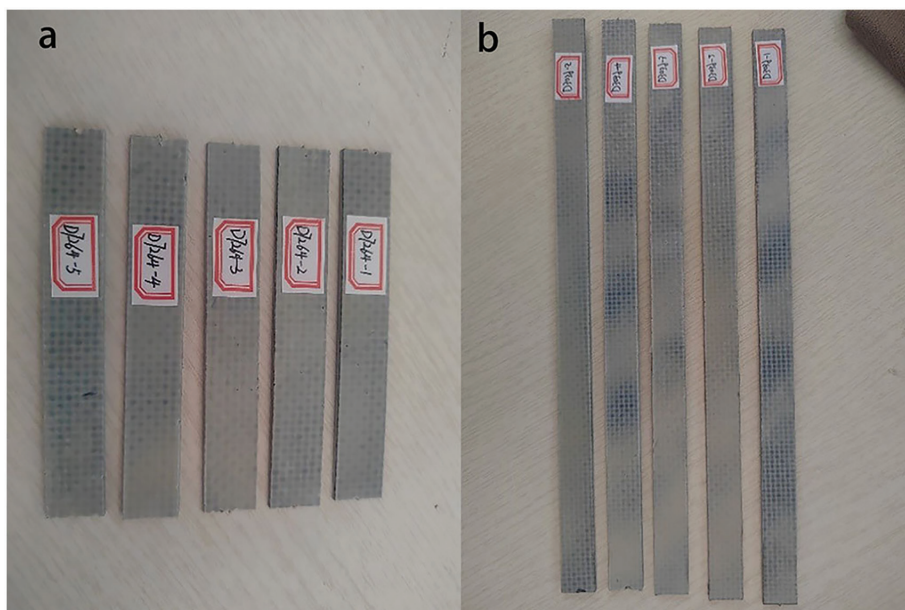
CARALL specimens prepared by compression molding: (a) Specimens for tensile test; (b) Specimens for three-point bending test.
